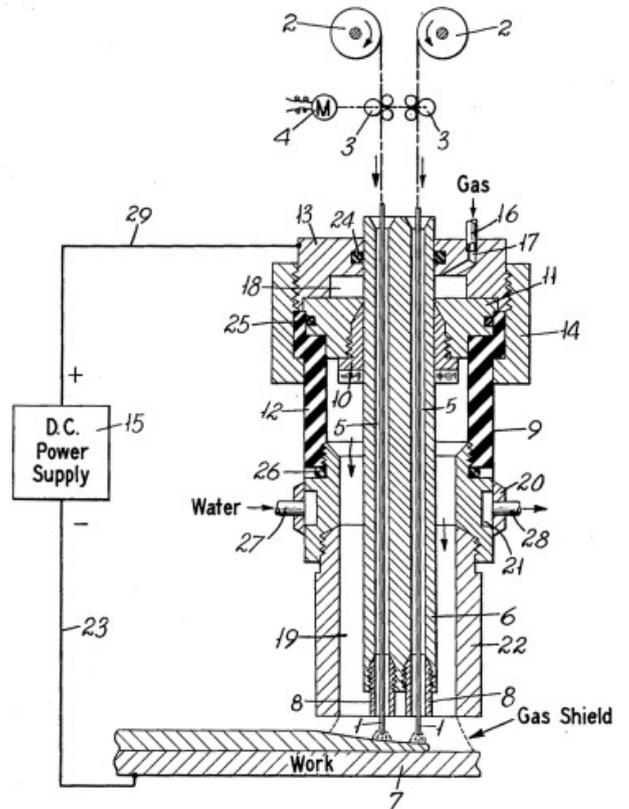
A. Newman: patent no. 3007033 "Inert gas shield metal arc welding"; 31.09.1961 [12]
